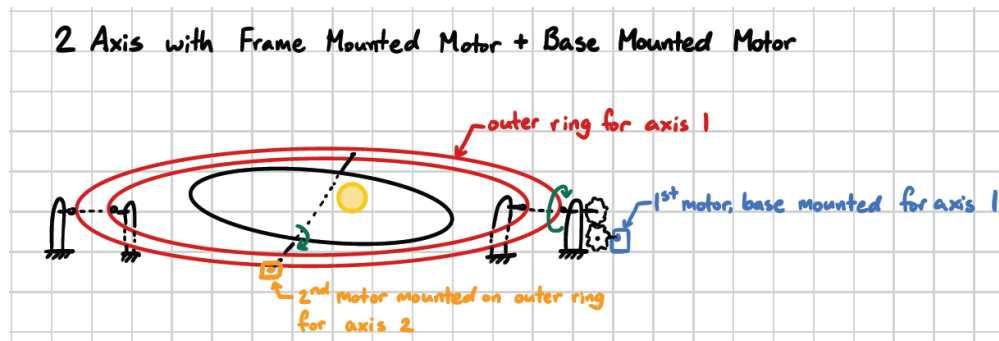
Concept of 2 Axis with Frame Mounted Motor and Base Mounted Motor Stewart Platform
